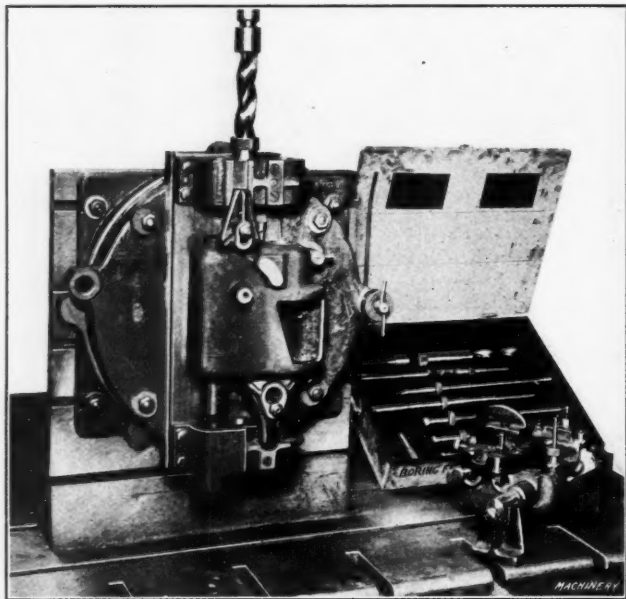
Jig and Tools for Machining Change-gear Boxes with Radial Drill
